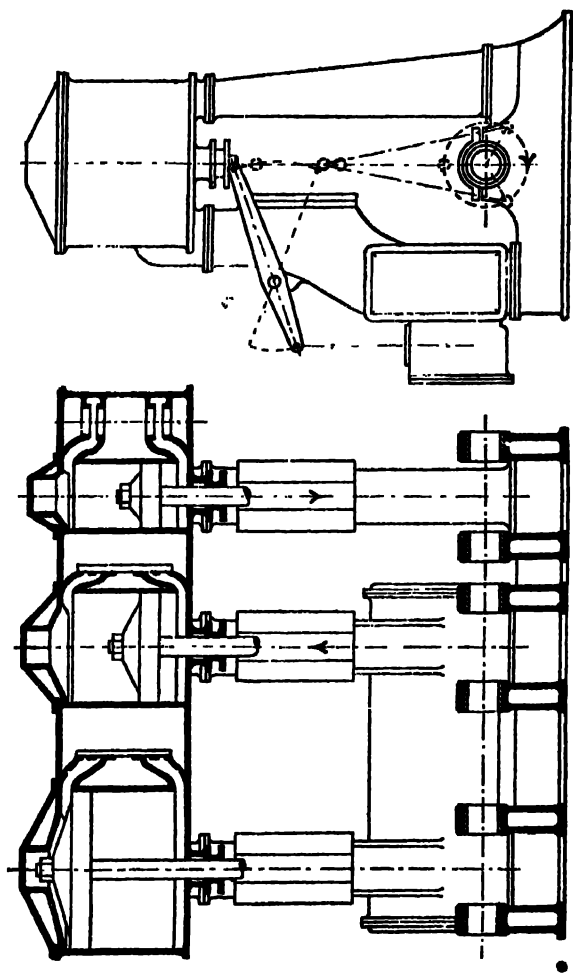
Outline drawing of a 6,000 I.H.P. marine engine.
